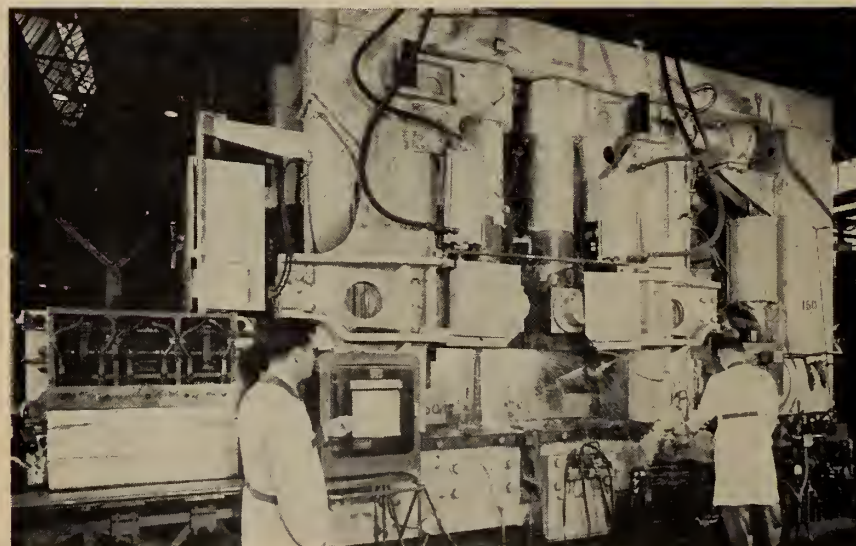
Fifty-square-inch flash-welder for research welding.
